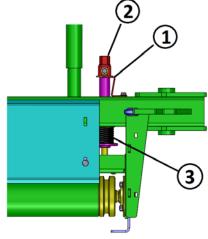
Idler End Adjustment Key 1 – Lock Key 2 – Shaft
